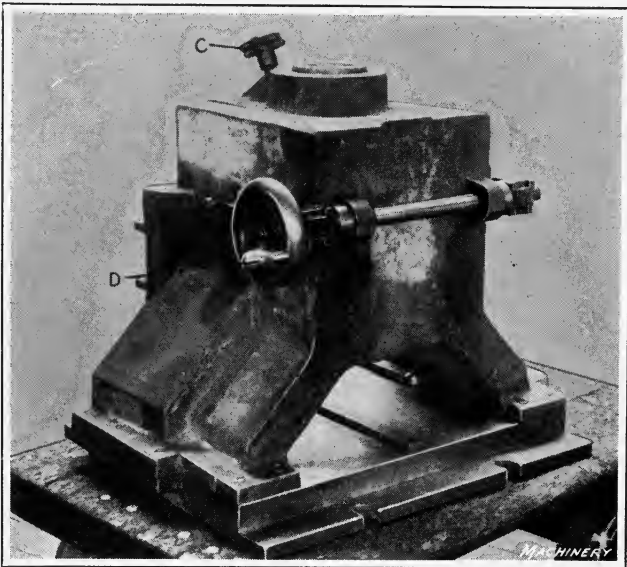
Rear View of Jig, showing Mechanism for operating Equalizing Clamps.
